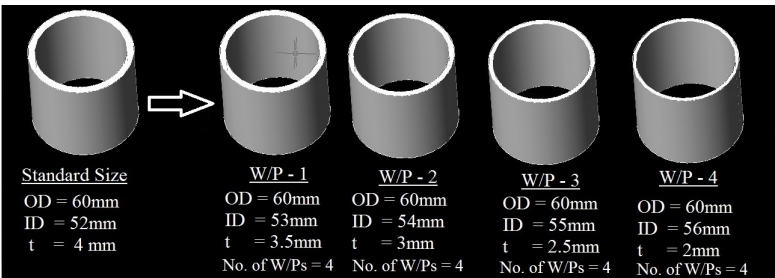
Dimensional details of 18-8 stainless steel workpieces.
